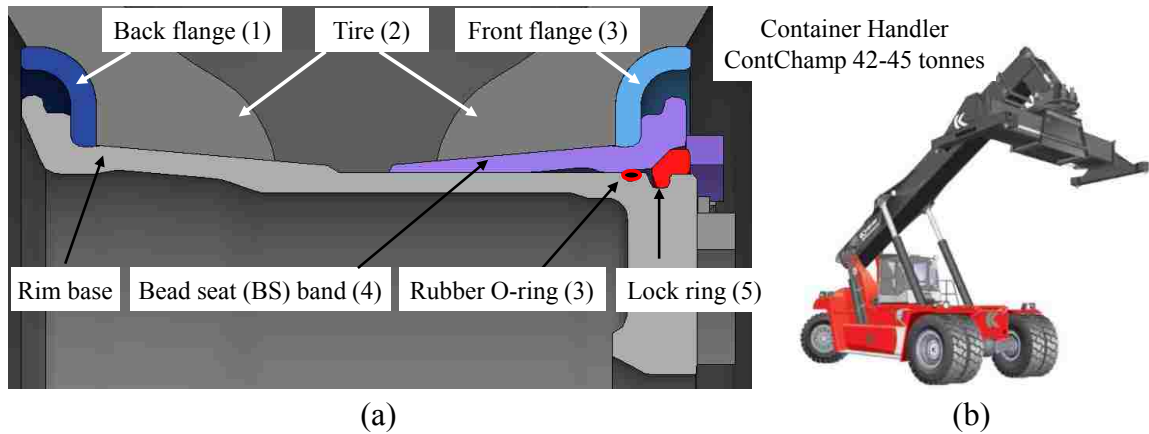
(a) five-piece wheel structure and (b) Kalmar ContChamp 42-45 tonnes container handler [128].
